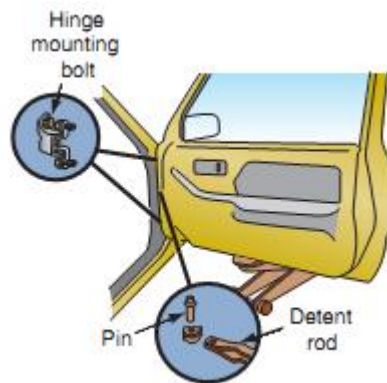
A floor jack covered with a shop towel or holding fixture is commonly used to support the weight of a door when loosening hinges. Have someone hold the door to keep it from falling when removing the last hinge bolt..
